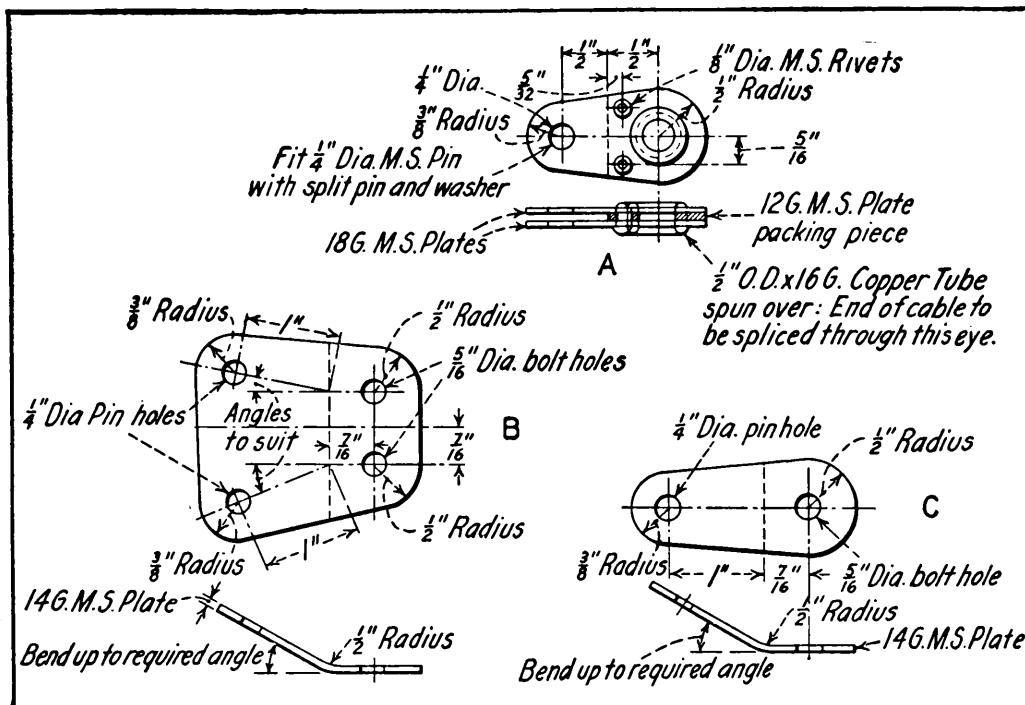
Wiring Fittings for the Dickson Training Glider. A—Fitting for Connecting Bracing Wires to the Wiring Plates, 24 Required per Machine. B—Double Wiring Plate, 3 Right Hand and 3 Left Hand Required Each Machine. C—Single Wiring Lug, 2 Right and 2 Left Needed Each Machine.
